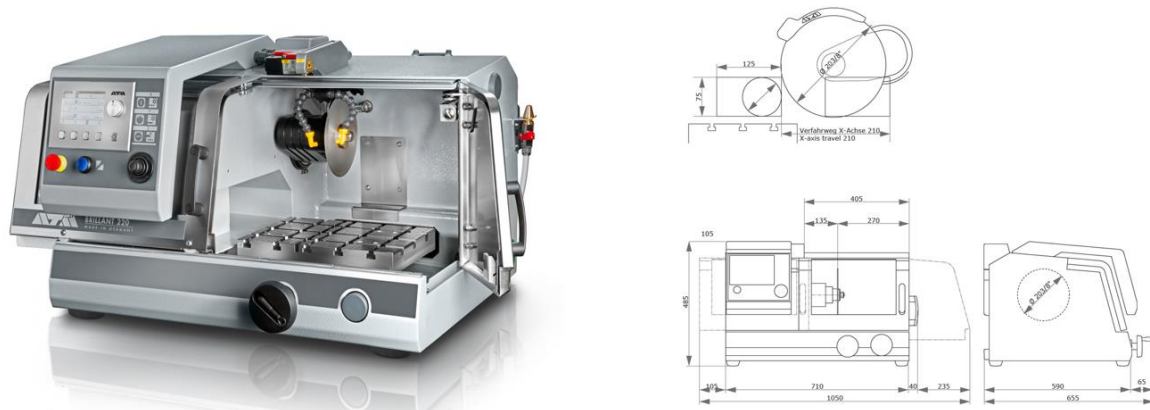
a) Miter saw BRILLIANT 200 cut machine. b) Dimensions of the BRILLIANT 220 machine [87].
